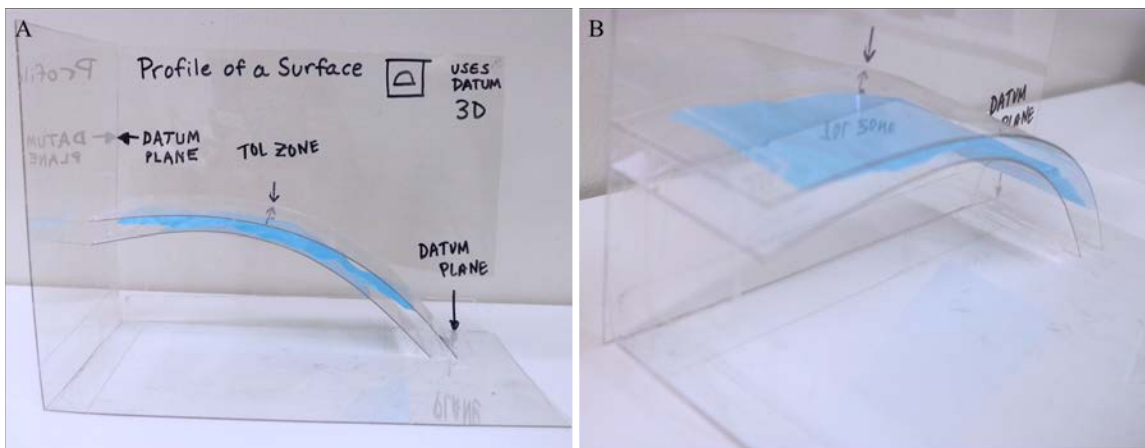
GD&T Spatial Learning Tool for Profile of a Surface Tolerance, A. Front View, B. Isometric View
